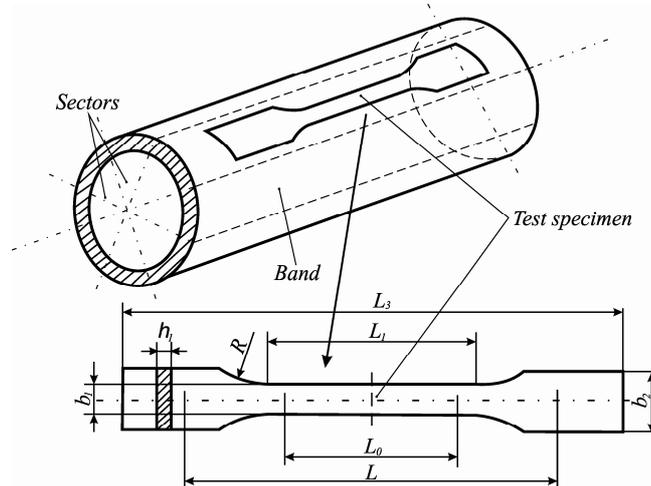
, Tensile test specimens according to SR EN ISO 527-2000
